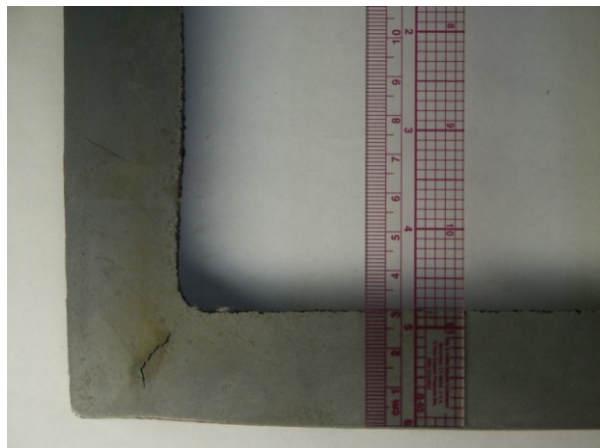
Con-cast billet after breakout showing off-corner sub-surface crack
